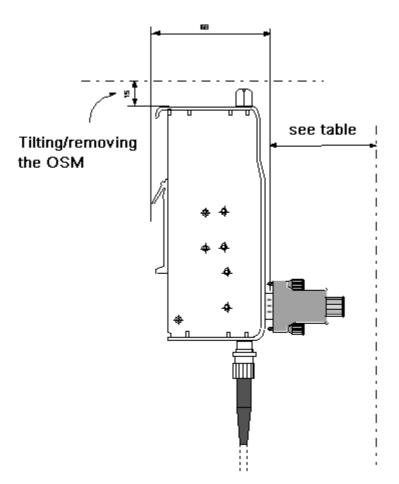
Industrial Ethernet OSM (side view; dimensions in mm)
